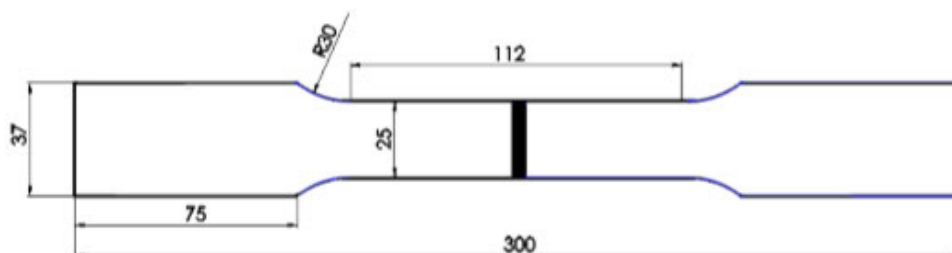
Tensile test specimen dimensions according to EN 895 standard
